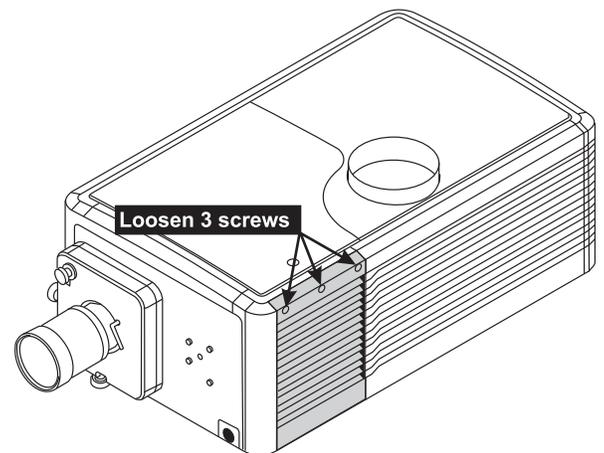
REMOVE LEFT ACCESS COVER
